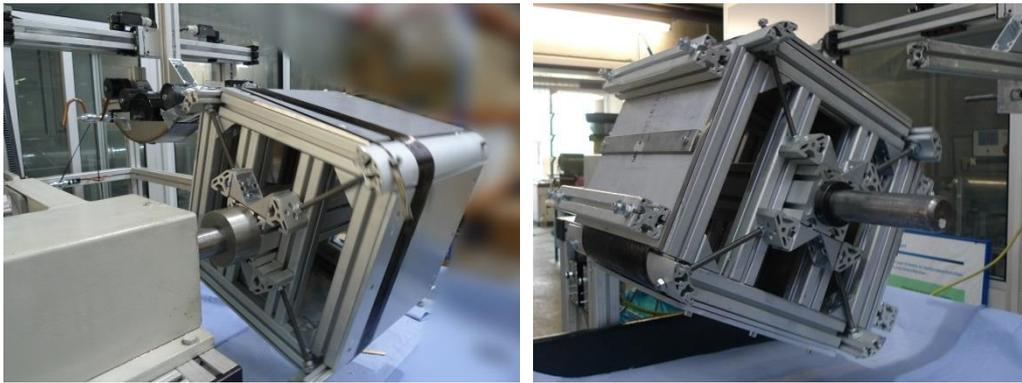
Filament winding of unidirectional plates – left: winding mandrel for flat composite plates; right: attachment of stiffening plates
